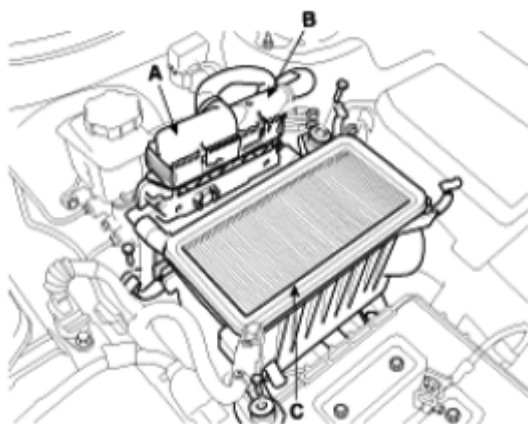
Identifying ECM Connector And Air Cleaner Lower Cover
